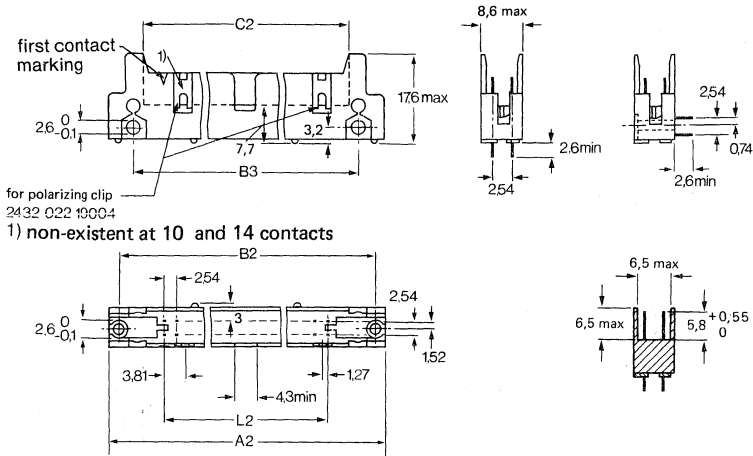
Male header with dip-solder pins; see Table 3 for dimensions A2, B2, B3, C2, and L2.
